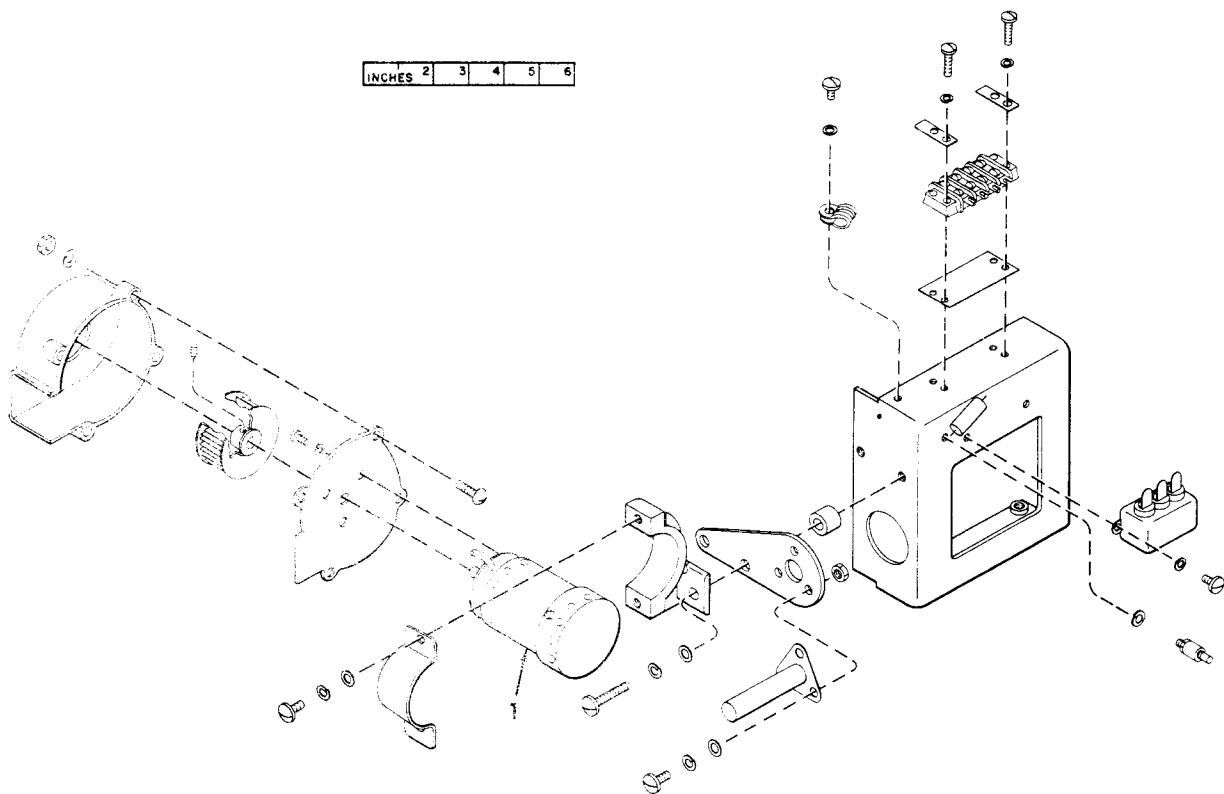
Power supply PP-1160B/M (9140697)—exploded view
